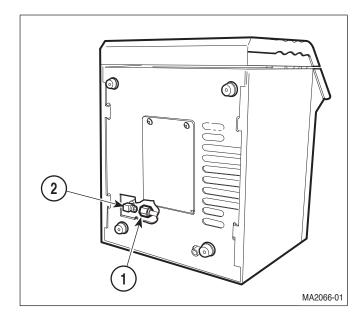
Condensing Tank Assembly Fill Tube Disconnection / Connection
